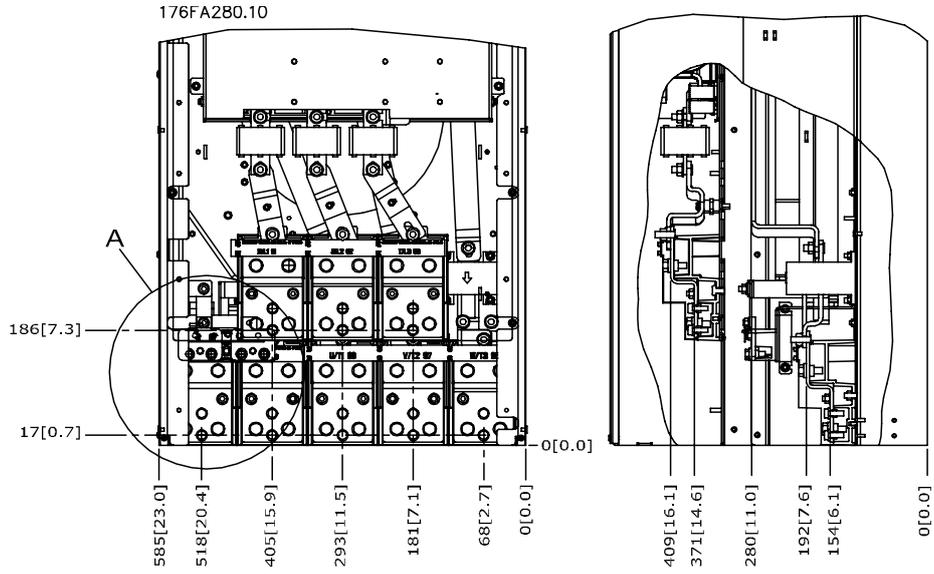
IP00 Open Chassis drive type power connection positions
